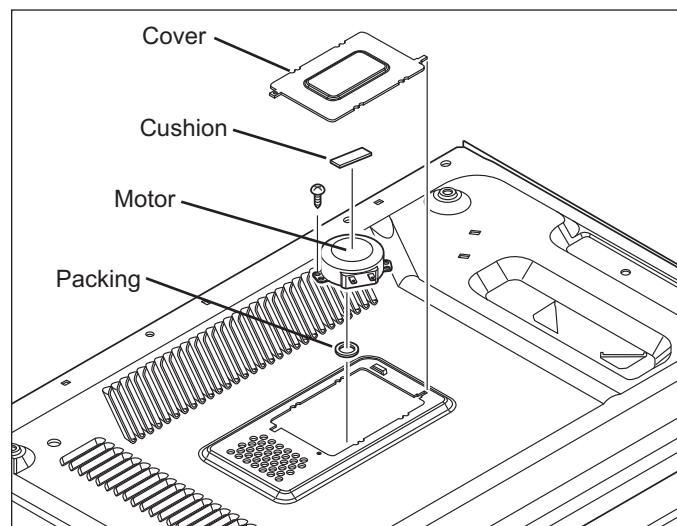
Turntable Motor, Cushion, Motor Packing and Cover Removal
